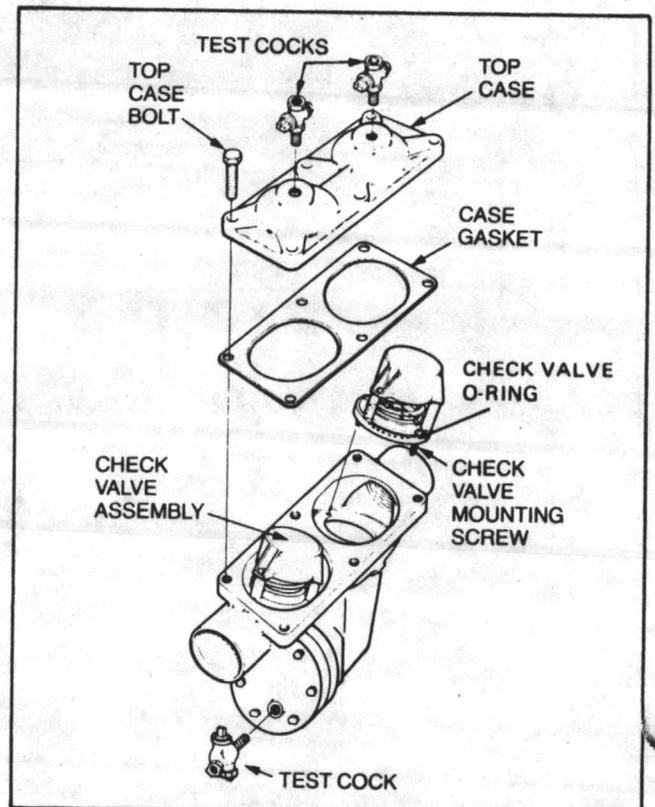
3/4" AND 1" CHECK VALVE ASSEMBLIES
